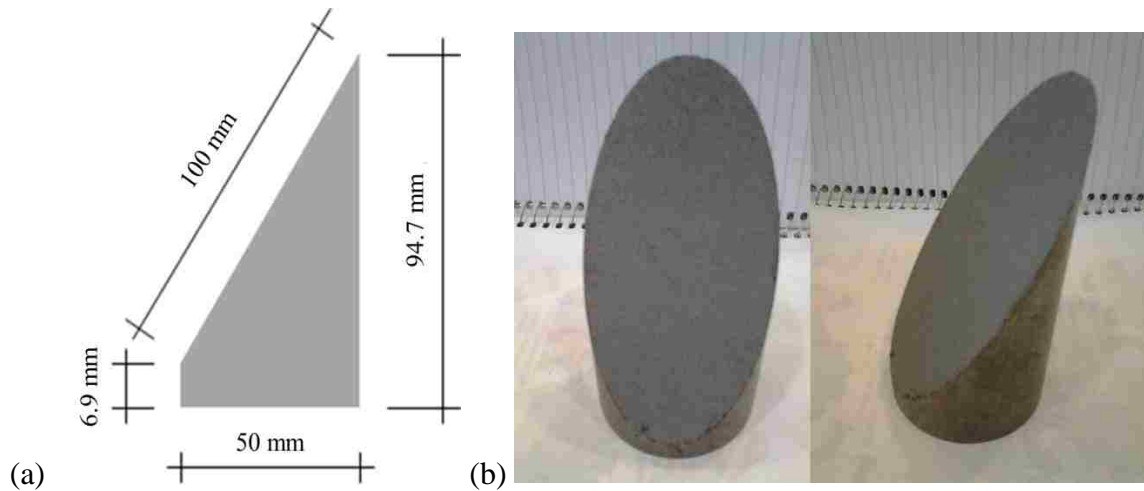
(a) Steel part dimensions, (b) Sandblasted half steel cylinder.
